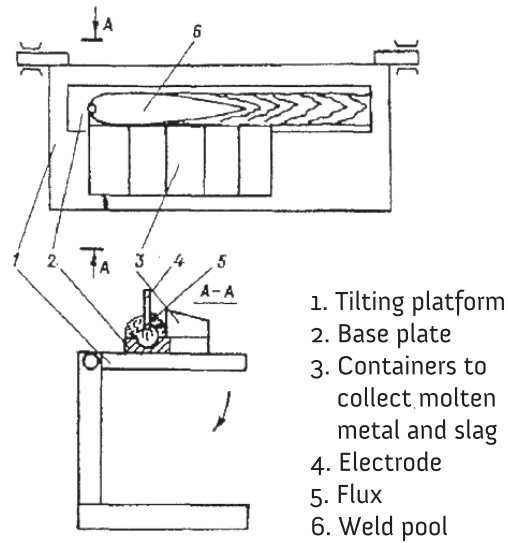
An experimental setup to investigate the presence of slag shell in SAW. Reprinted from Ref. [39,40]. The welding was done on a tilting platform which was tilted during welding to collect molten slag and metal from different places of the weld into containers.
